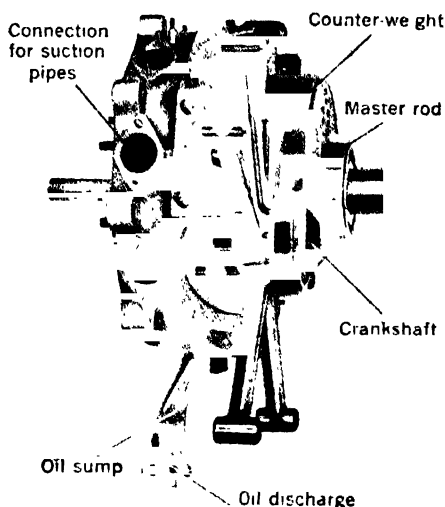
Crankshaft and Connecting Rod Assembly and Mixture Distributor of the Nine-Cylinder Siemens-Halske Radial Engine.
